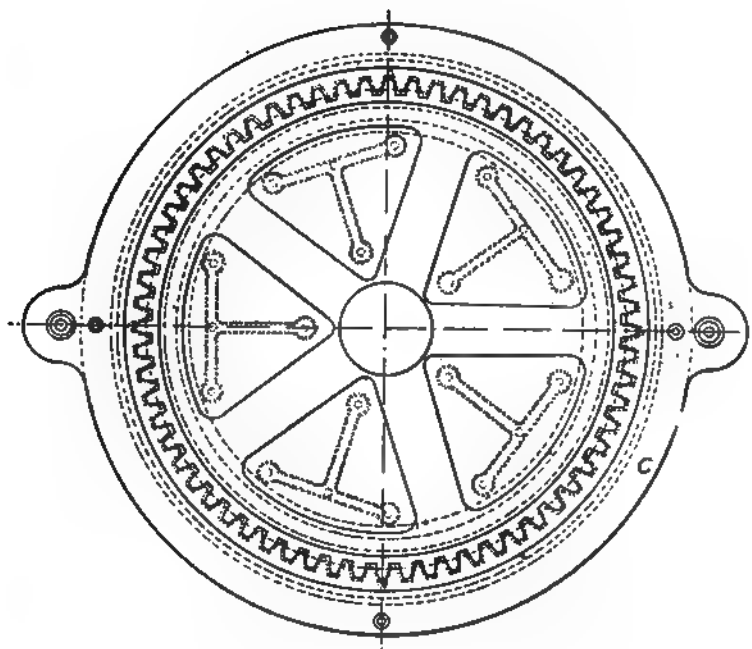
Pattern Arrangements for Bottom Part of Mould.
